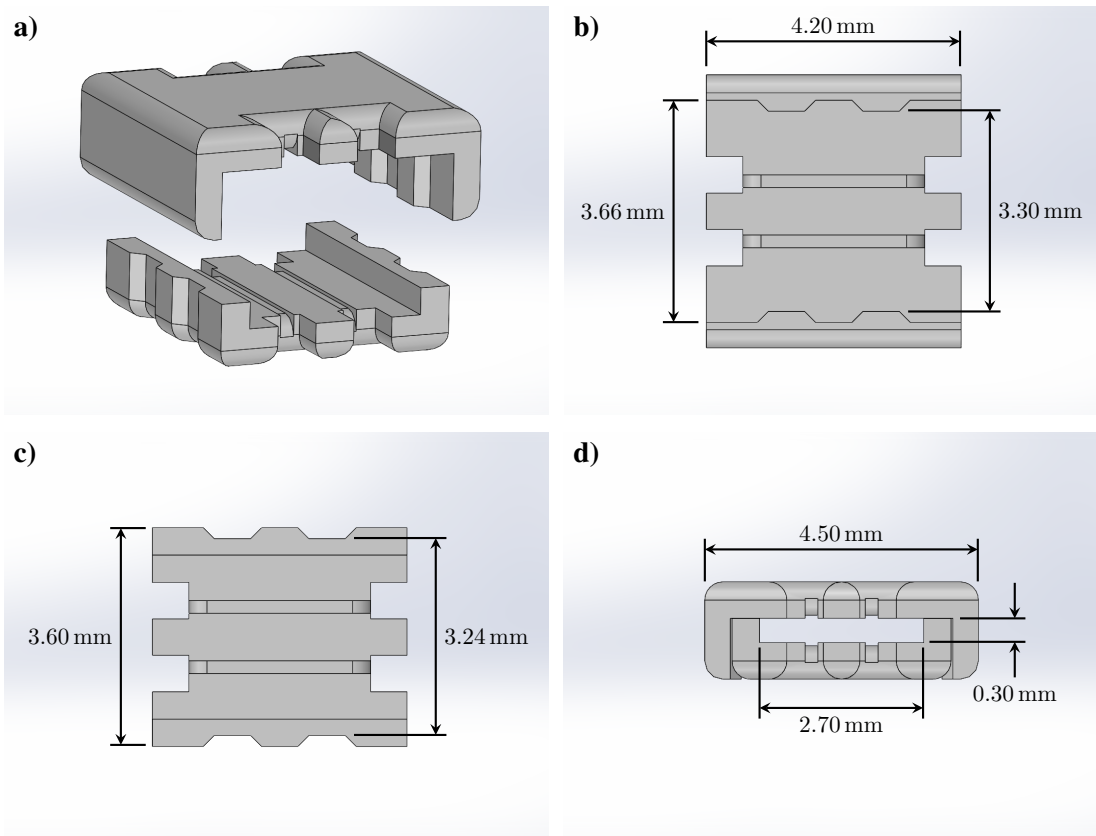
CAD drawing of the 3D printed clip used to press Cu wires onto the CNT contact pads. Only the dimensions important for securing the clip onto the CNT/PDMS conductors are shown. a) Exploded view of both clip parts. b) Top view of the larger clip half. c) Top view of the smaller clip half. d) Front view of the clip when both halves are fastened to each other.
